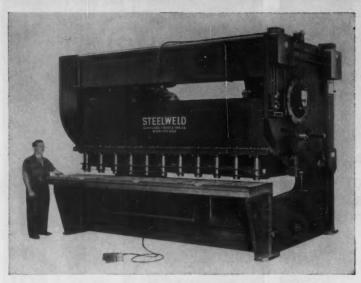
Steelweld shear incorporates pivoted-blade principle to avoid wear and inaccuracy.
